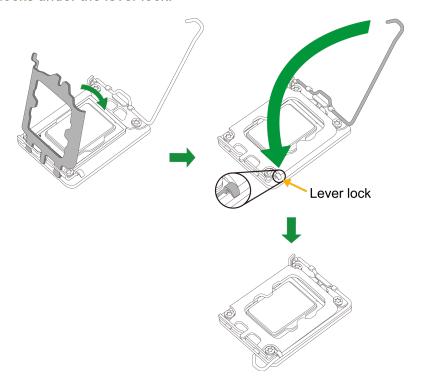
Closing the Load Plate and Pushing the Lever Down
